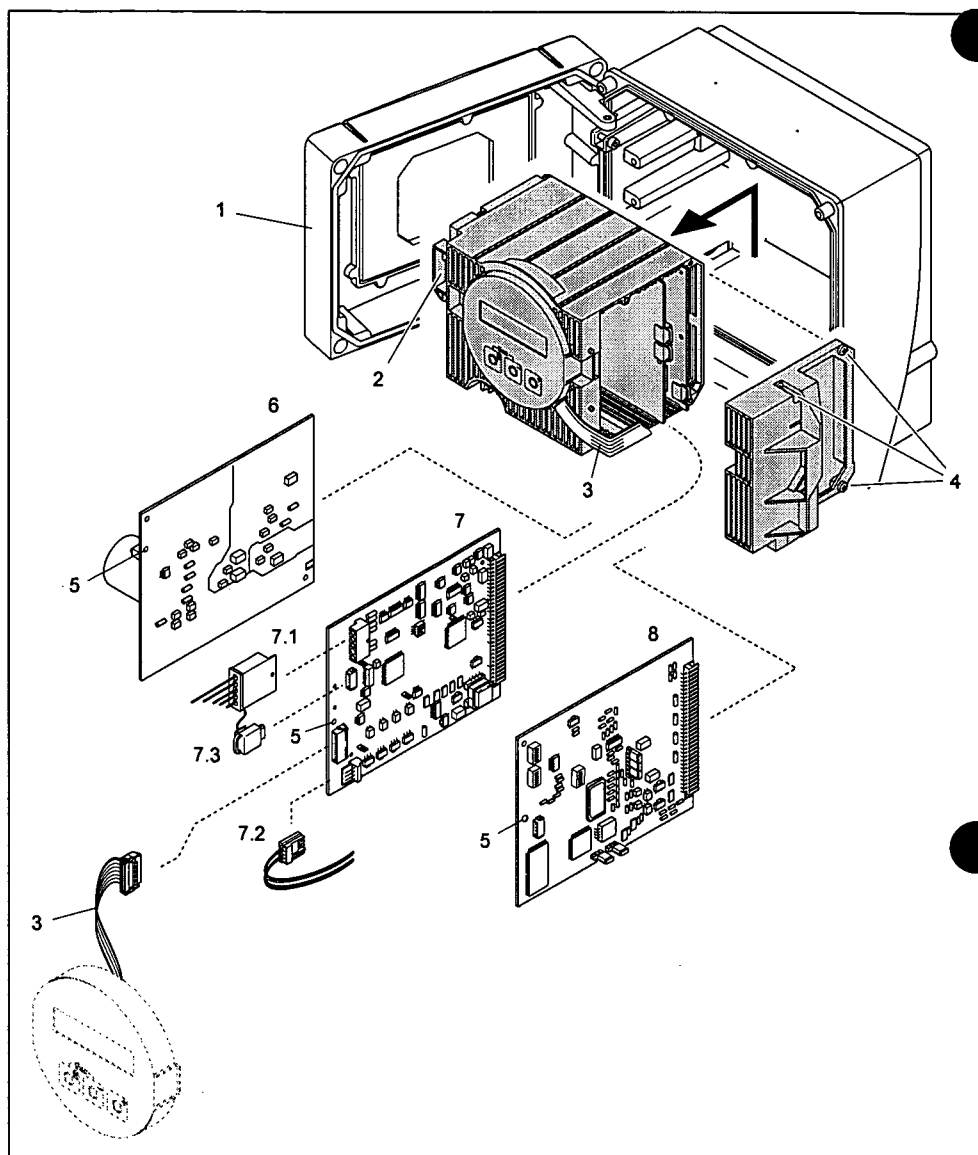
Wall-mount housing: removing and installing printed circuit boards
